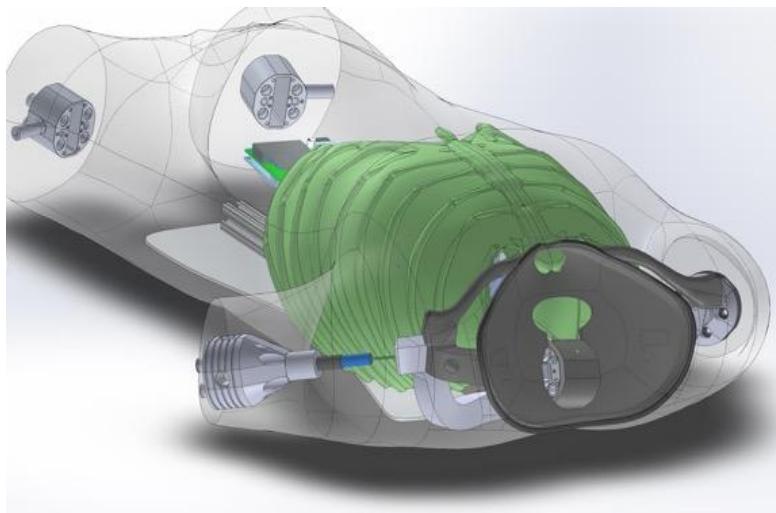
Structural manikin chassis with head interface plate, head connector, shoulder joints and rib cage plates.
